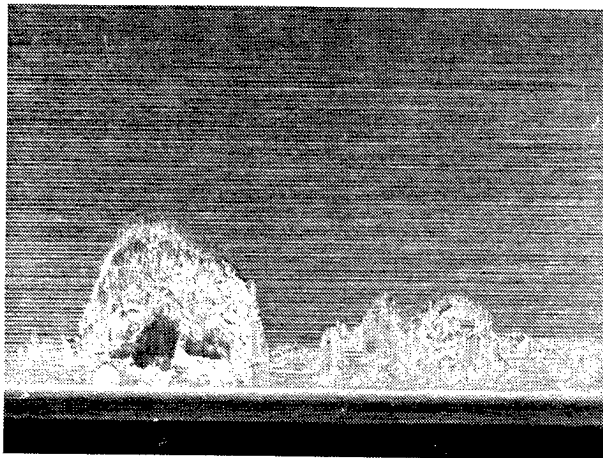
Close-up of ESB Spindle Bore Showing Scoring Damage Observed After Removal From Spindle During De-Integration
